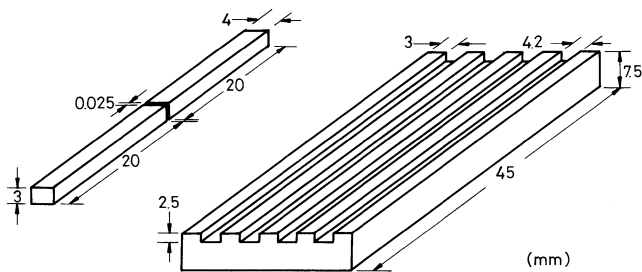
Ceramic/filler metal/ceramic specimens and assembly brazing holder.
